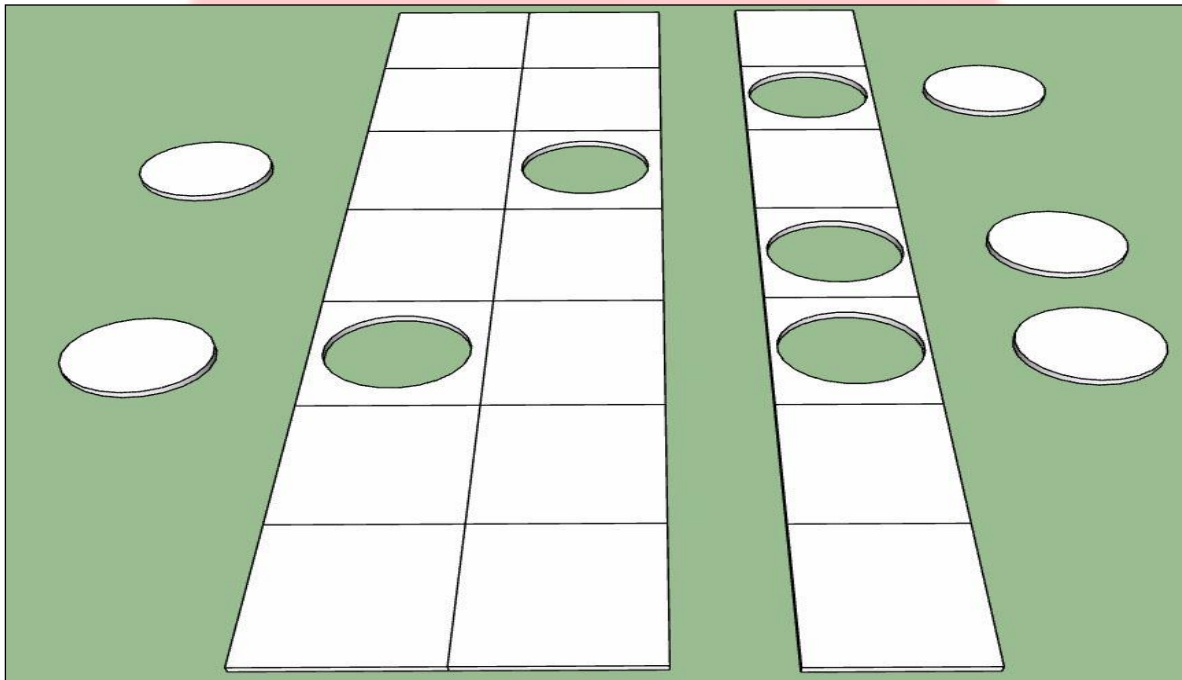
Circular Cut-outs from Inner Cut-out 1 and Inner Cut-out 2
